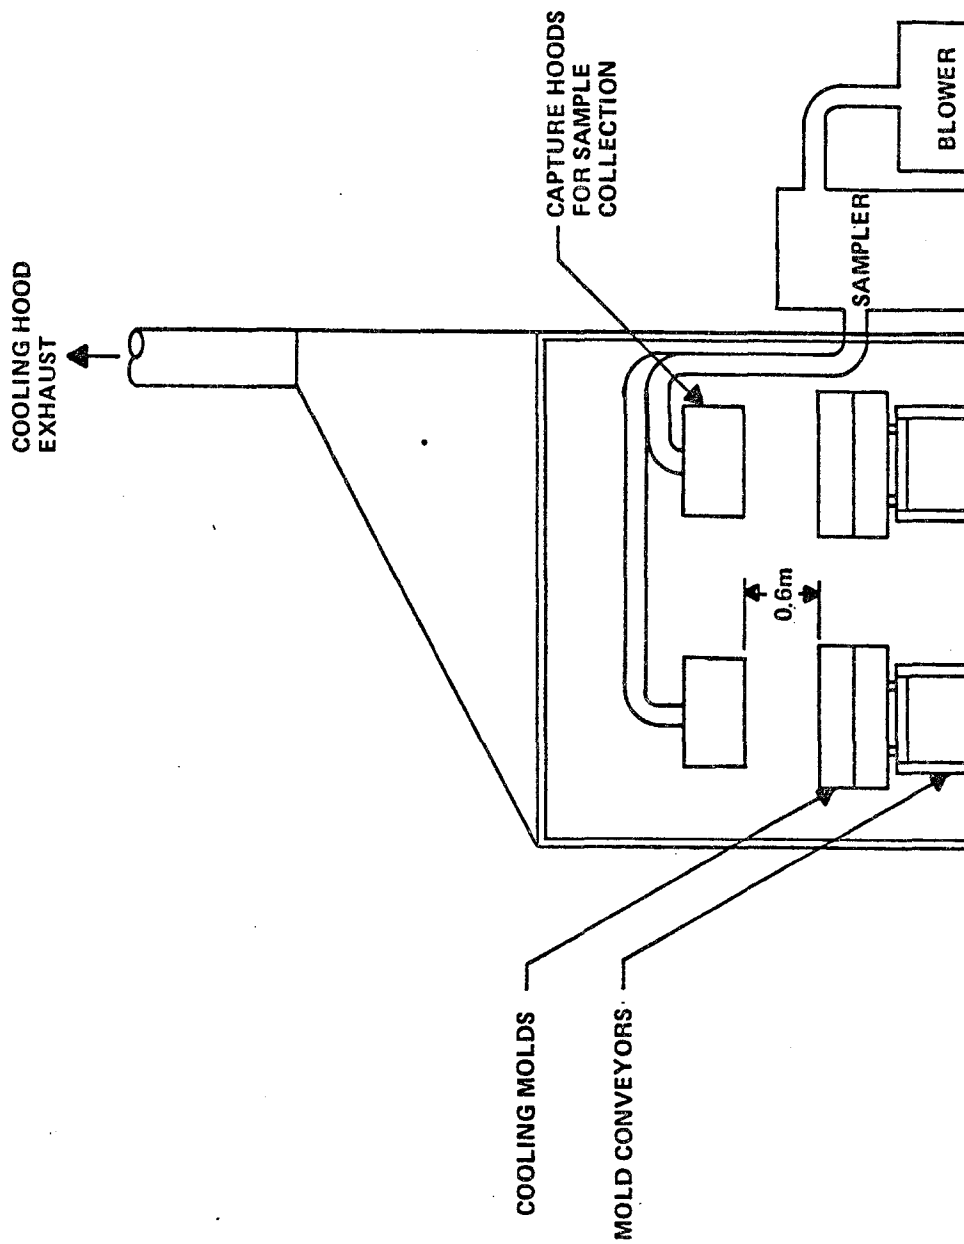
URETHANE MOLDS – CAPTURE HOODS INSIDE COOLING TUNNEL
